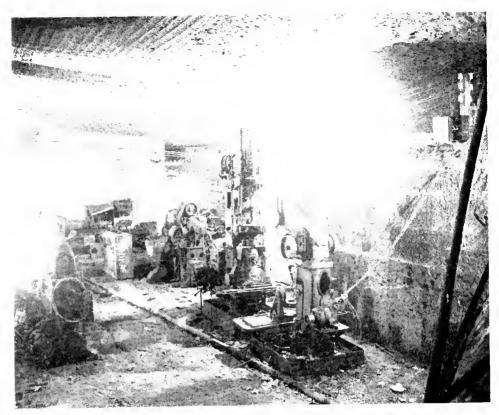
Cylinder barrel shop, Tomura plant at Oya Works.
